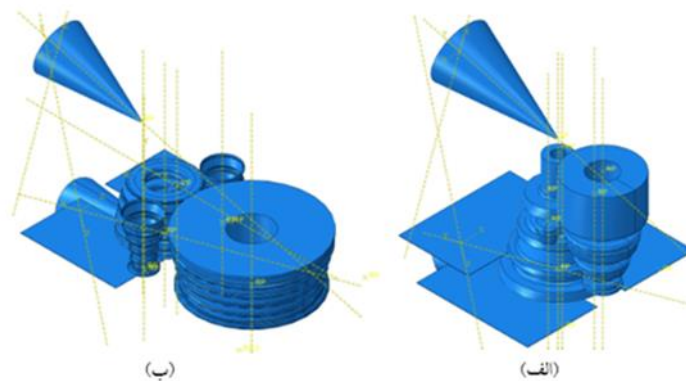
Assembled parts of aircraft engine spools (a) Front spool (b) Rear spool
